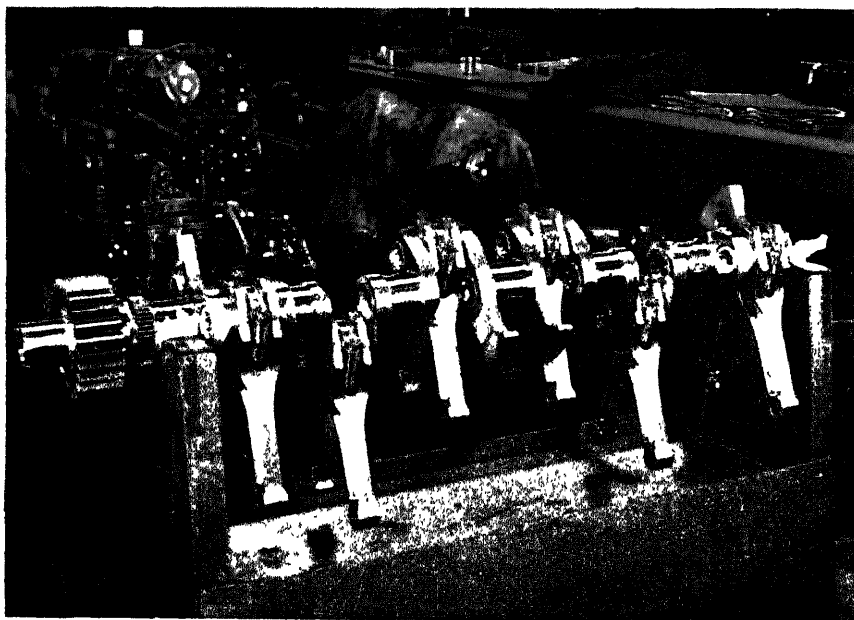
CRANKSHAFT, SHOWING CONNECTING RODS ASSEMBLED AND REDUCTION GEAR
